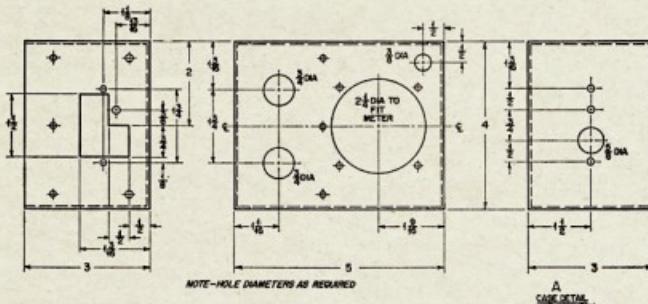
Box, shield and mounting bracket layouts and drilling dimensions.
